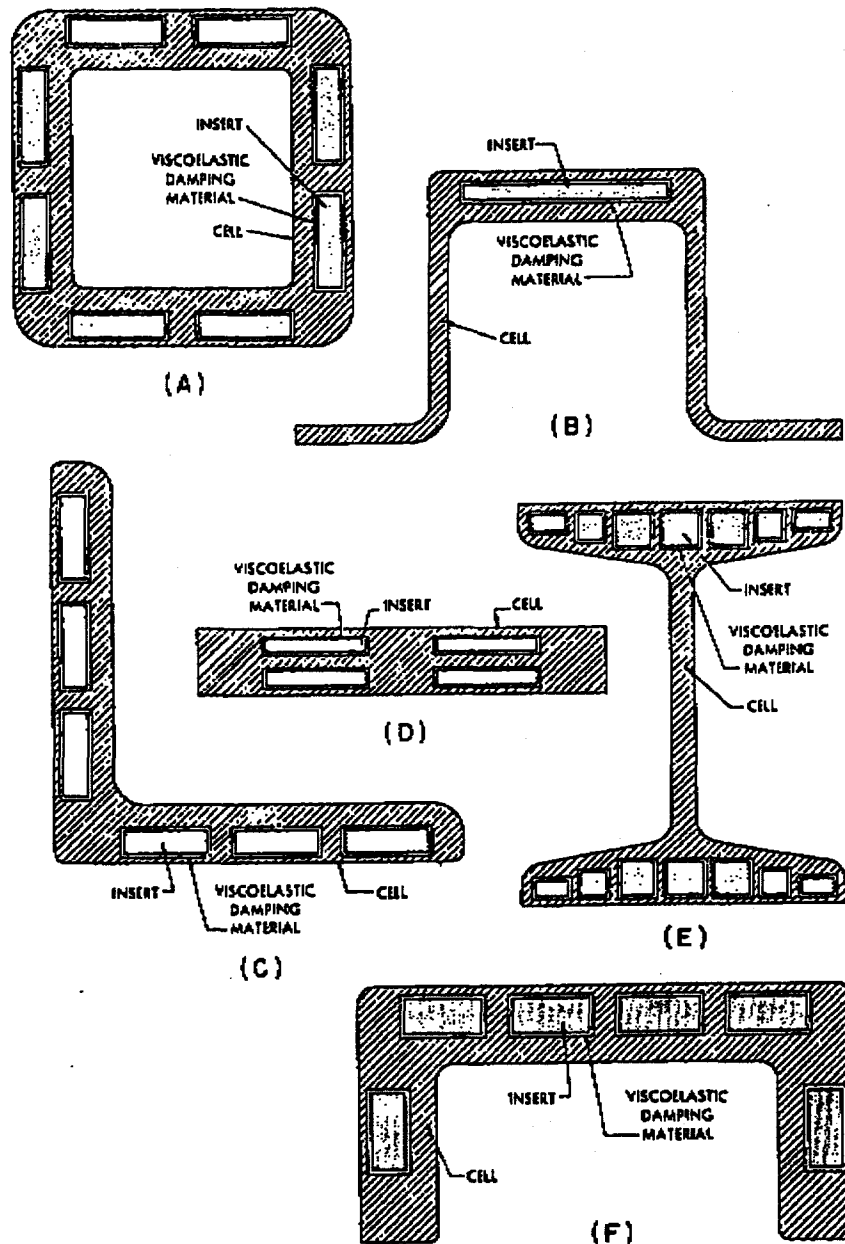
B. Cross sections of viscoelastic shear-damped composite structural beams of cell-insert construction: (A) square-tube, (B) hat-section, (C) angle, (D) flat-bar, (E) I-section, and (F) channel designs. (After Ruzicka.²⁴)
